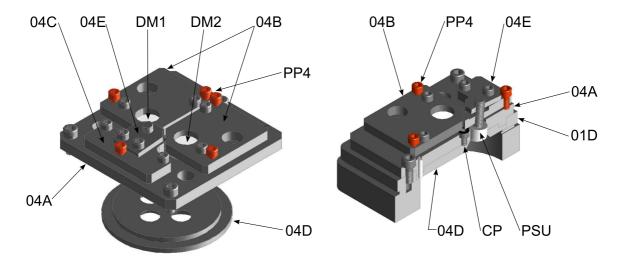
The view of the optical plate with PSU holder and two DIMM mirrors alignment plane.
